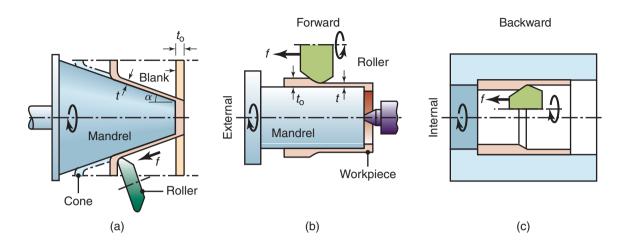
(a) Schematic illustration of the shear-spinning process for making conical parts. The mandrel can be shaped so that curvilinear parts can be spun. (b) and (c) Schematic illustrations of the tube-spinning process.
